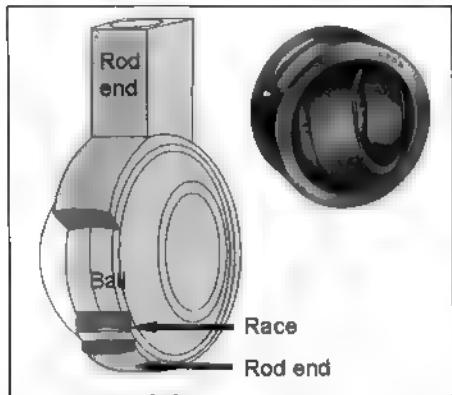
Left, a rod end; right, a spherical bearing showing the layout of the lubrication ways. Photo courtesy the Timken Company.
